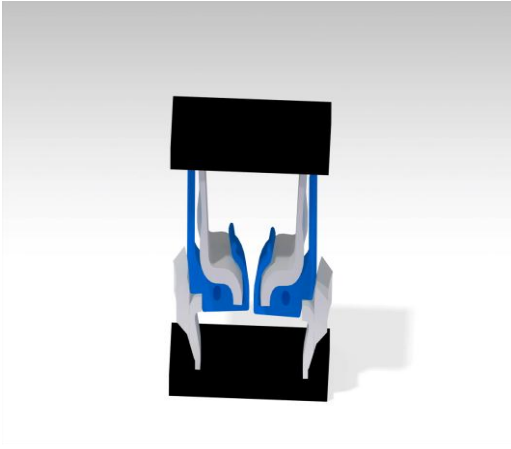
Fixture for UTM Machine of 7.5" wheel cross-section
